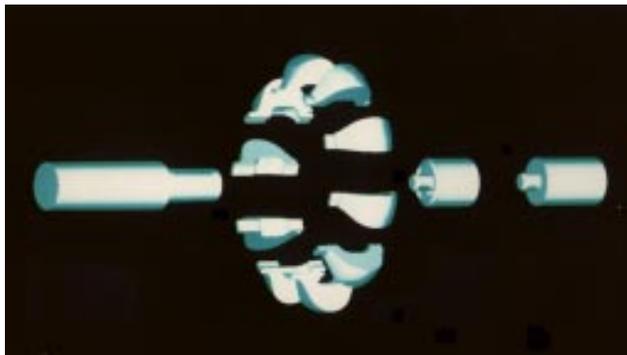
Exploded view of the collapsible mandrel for 1.5 GHz cavities.
